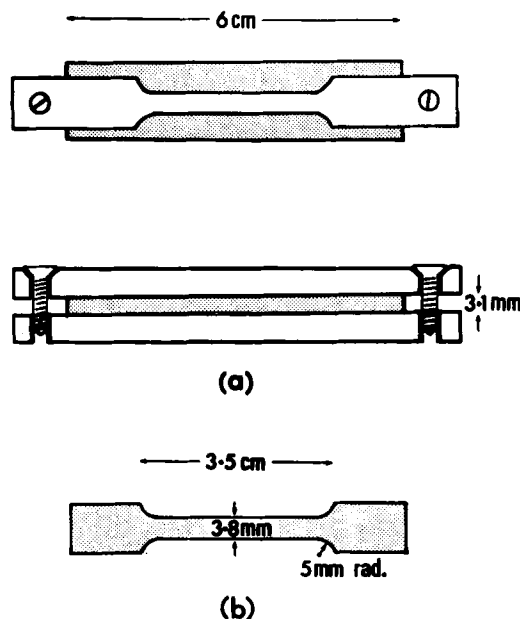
(a) Template production of tensile test piece. (b) Dimensions of completed test piece.
